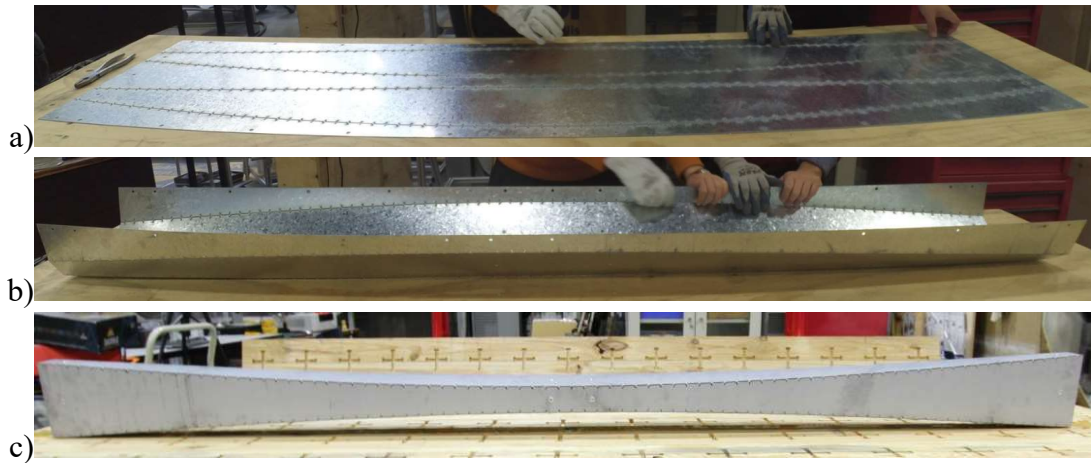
Steel spindle beam manufacturing process. a) CNC-cut unfolded steel sheet. b) Partially-folded sheet. c) Folded prototype.
